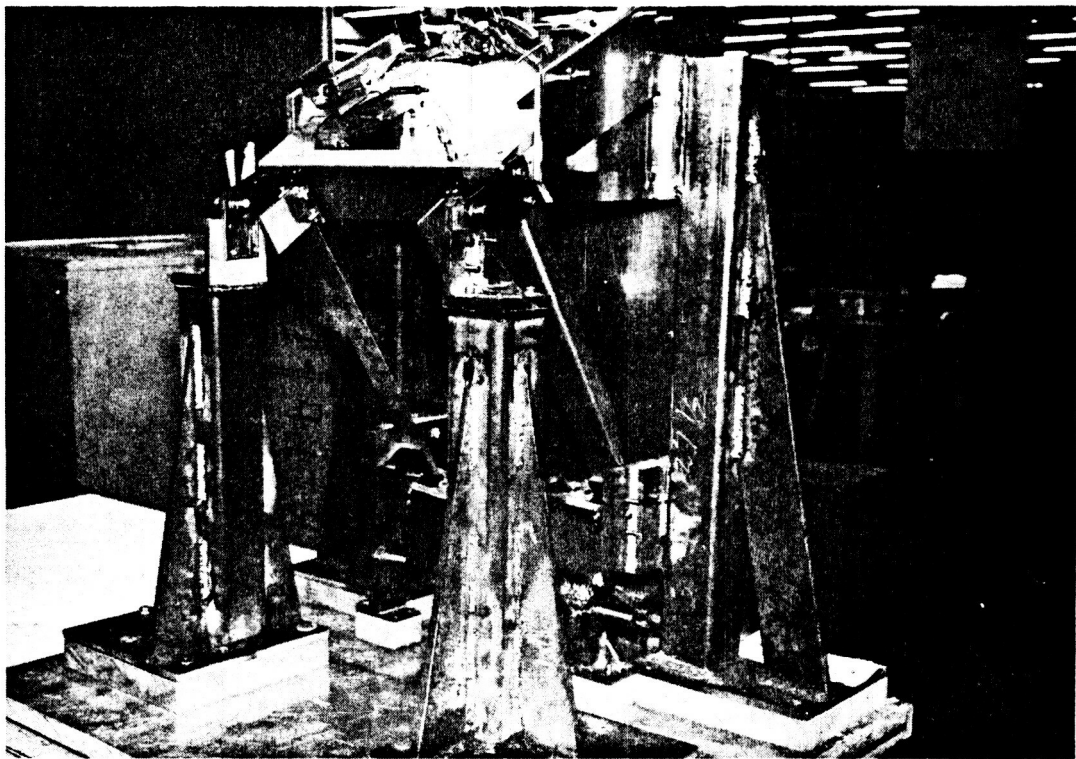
ASSEMBLY FIXTURE WITH SUPPORT STRUCTURE IN BUILD-UP STAGE
